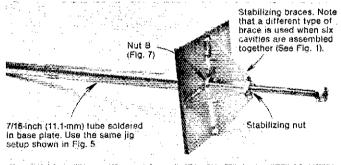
The completed frequency-adjustment assembly for a single cavity. Note the two nuts used at the end of the threaded rod. These were tightened together to form a "handle" for easy frequency adjustment.
